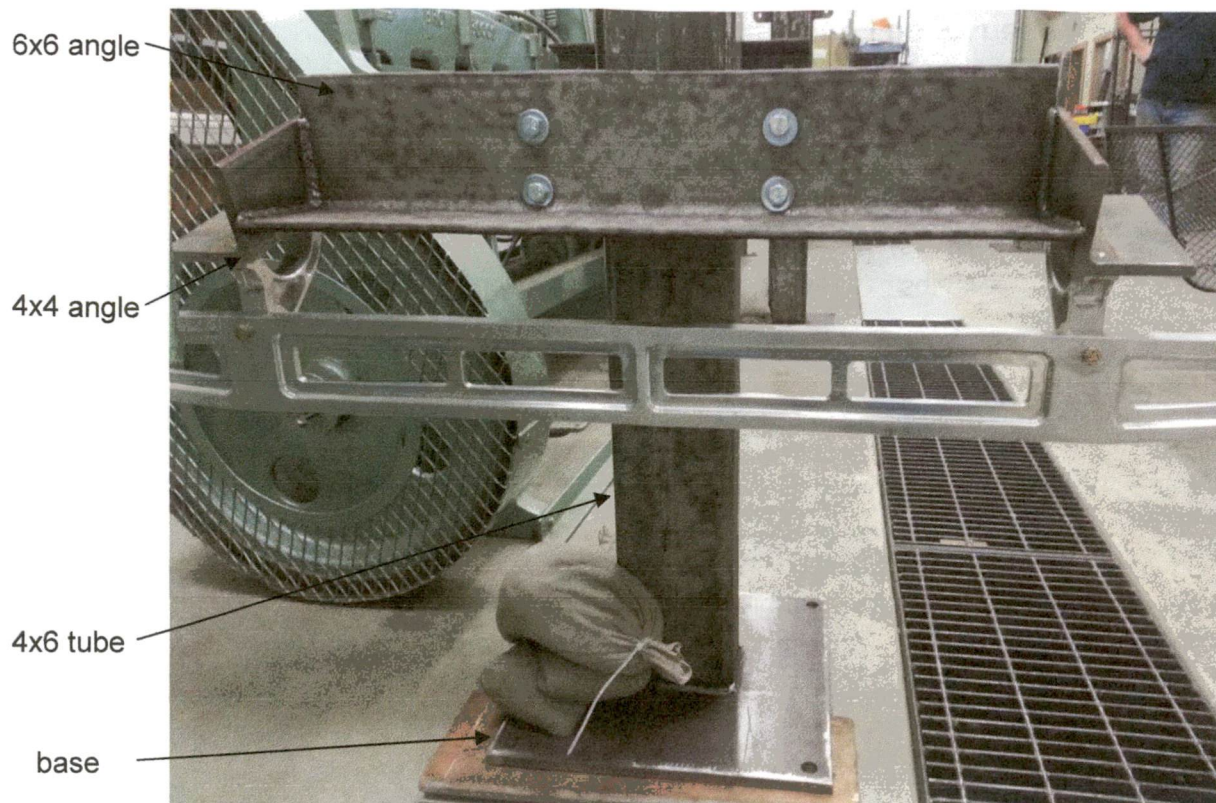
Test Fixture – Looking aft at forward fixture
